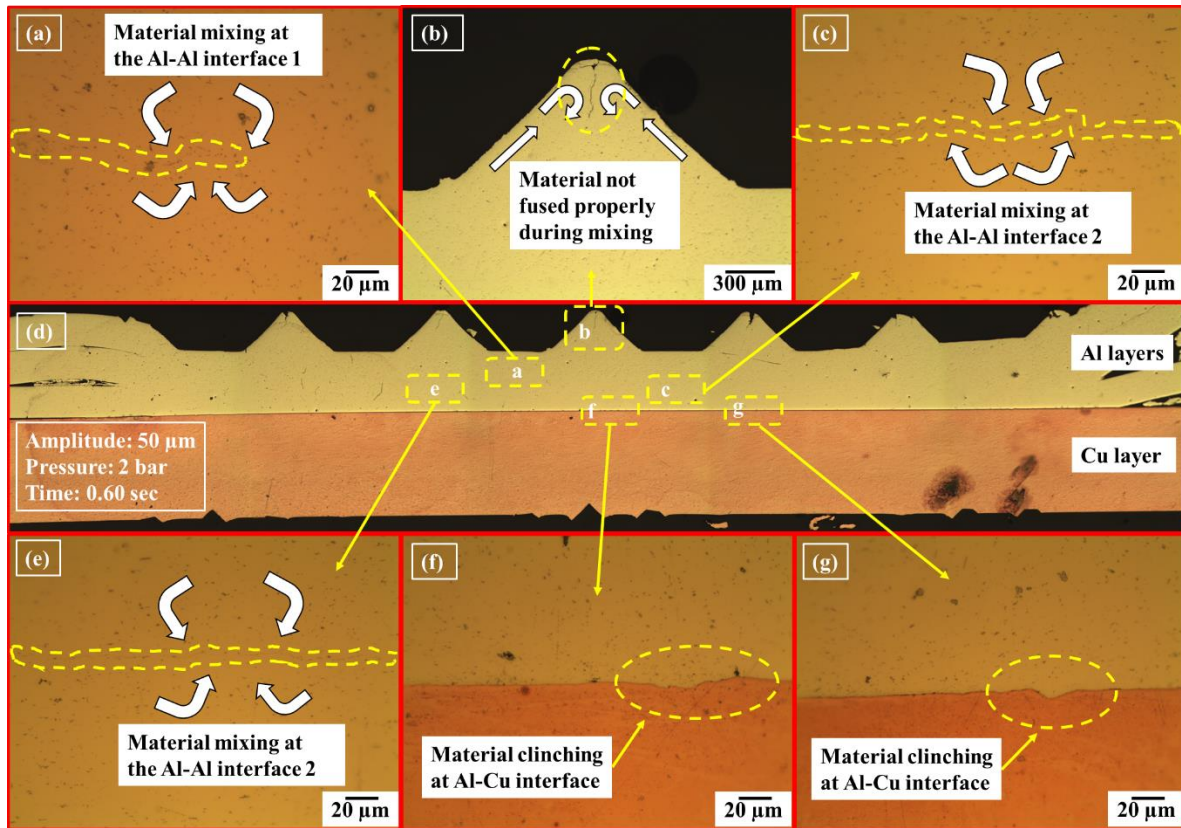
Typical optical micrograph of a good-weld indicating welding mechanism.
